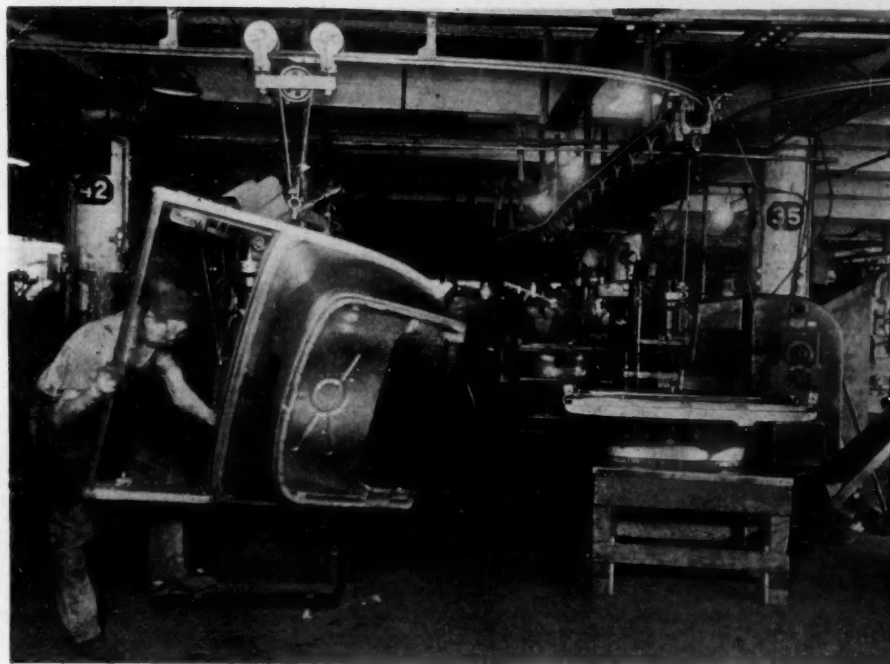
ASSEMBLY LINE ADAPTED TO WELDING OPERATIONS
